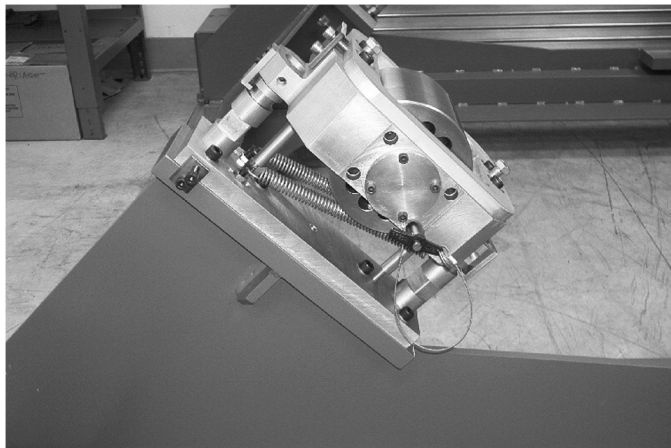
A self-steering roller assembly mounted on one corner of the IMACS carriage. The roller that bears against the IMACS disk is held in a rectangular frame that can toggle between two pivot points, causing the roller to act as a trailing caster for both directions of IMACS rotation. The switch between pivots is accomplished by the friction forces between the disk and roller when the rotation direction reverses and by additional frictional forces generated by the roller scrapers.
